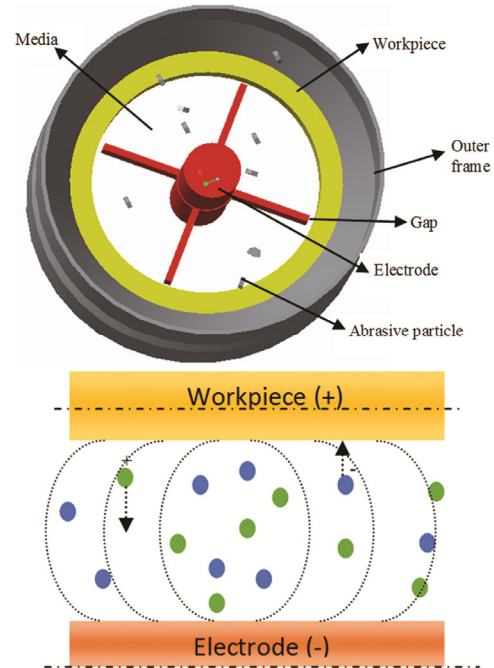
Mechanism of material removal in the developed TACAFM process.
